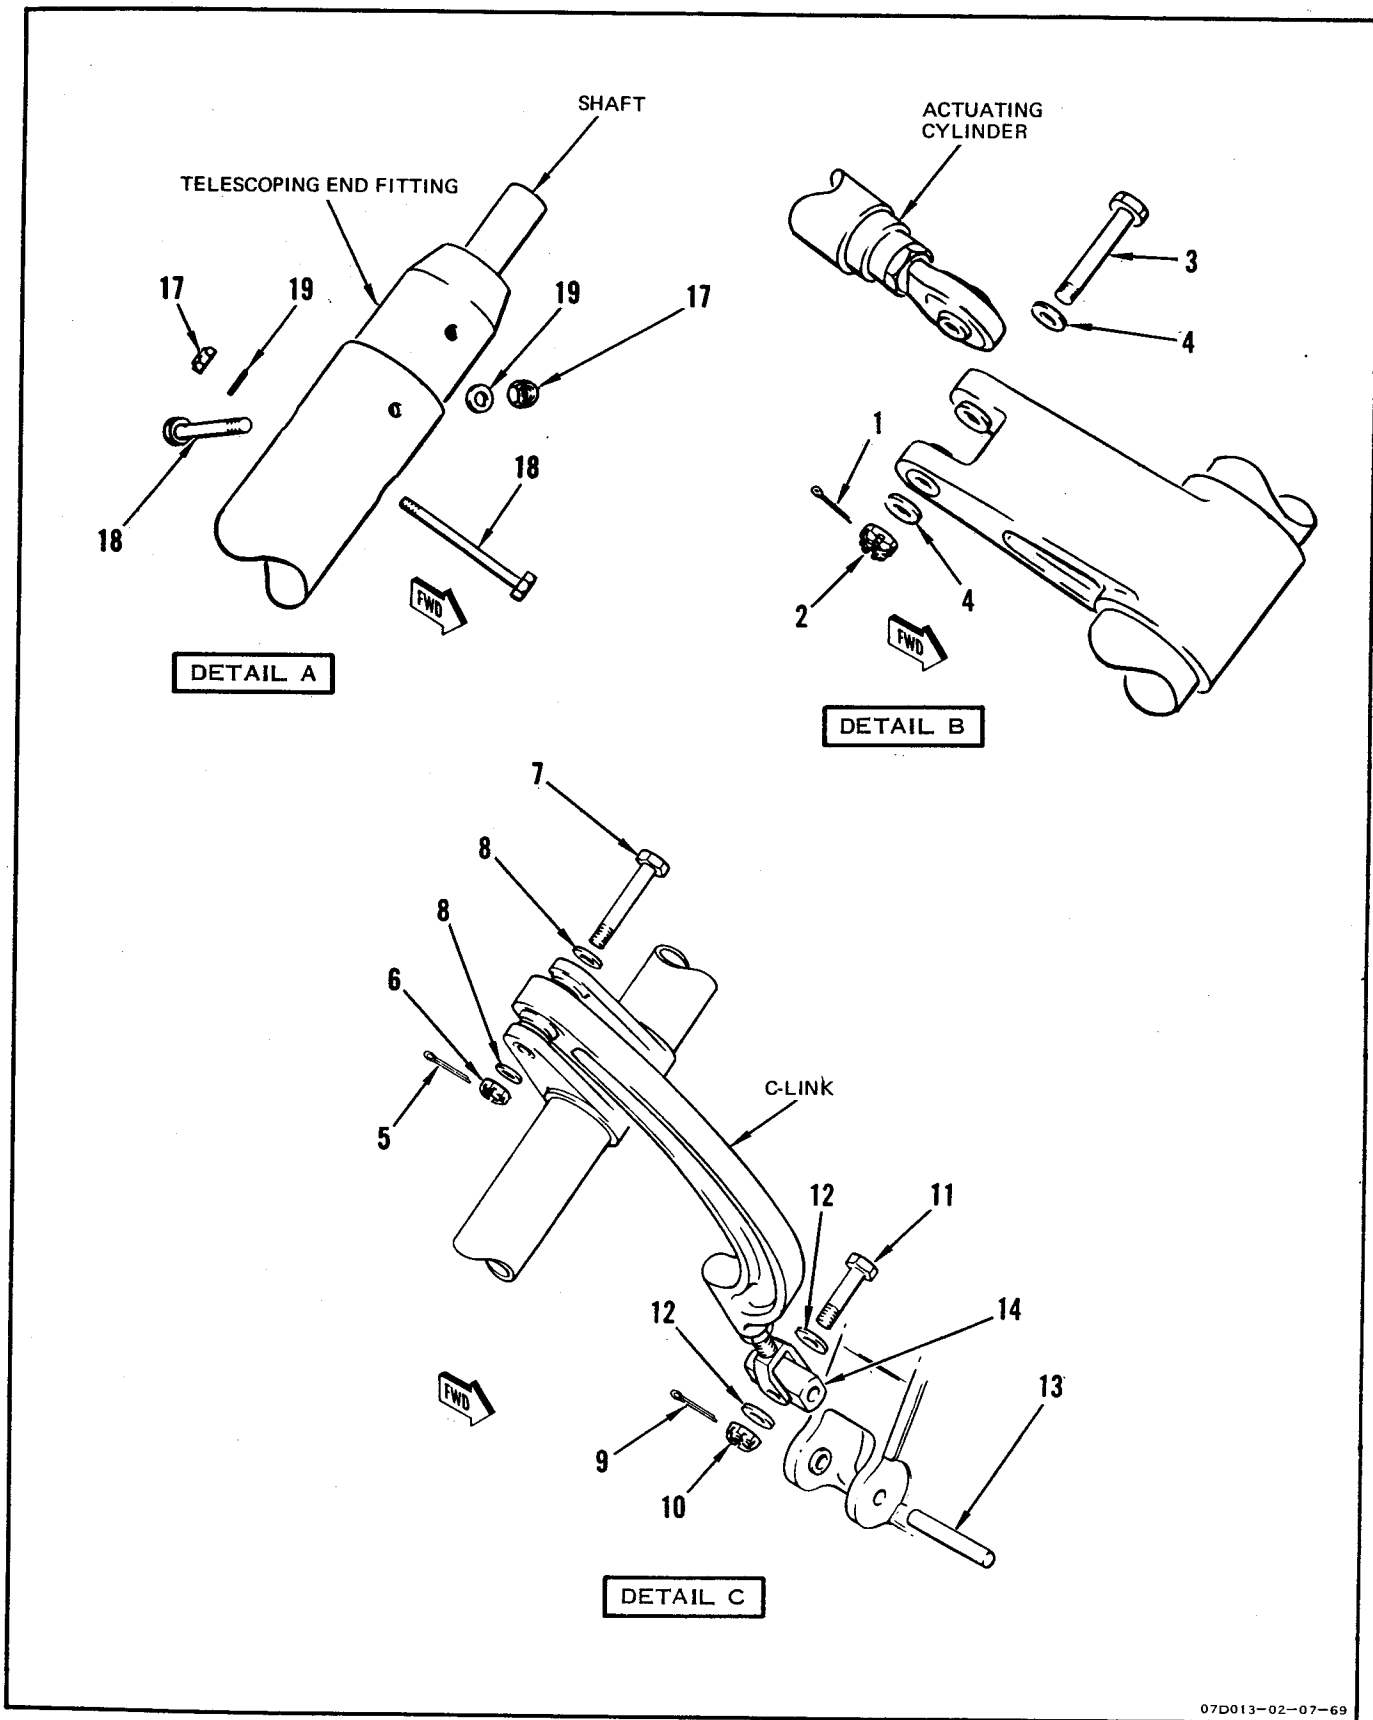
Main Gear Door Torque Tube Removal and Installation (Sheet 1)
